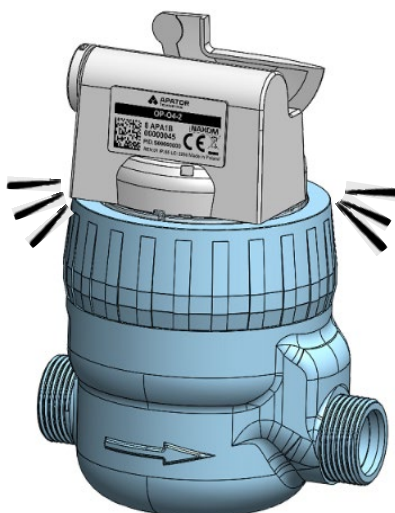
View of the assembled SV-RTK water meter with the OP-04-2 module.
